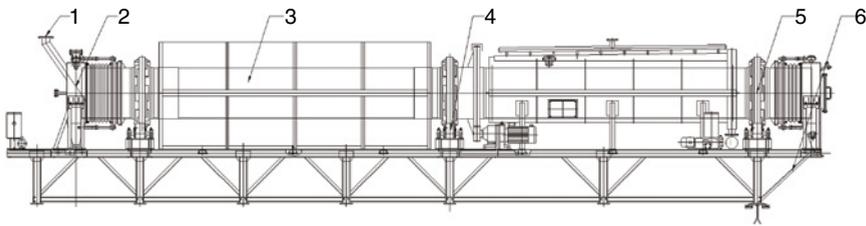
Rotary kiln. 1 – Feeding device; 2 – cylinder device; 3 – heating device; 4 – transmission device; 5 – discharge device; 6 – the frame body.
